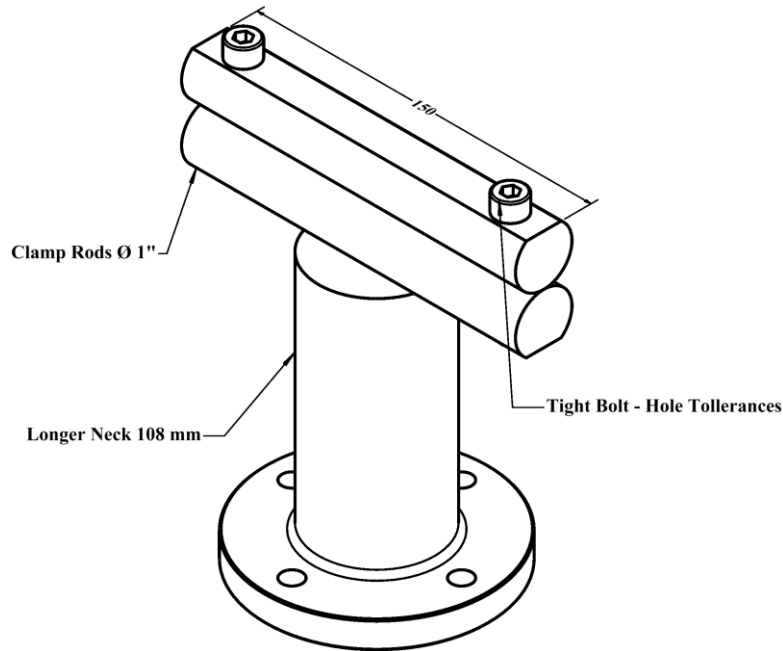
New Fixture used to clamp the components inside the environmental chamber
